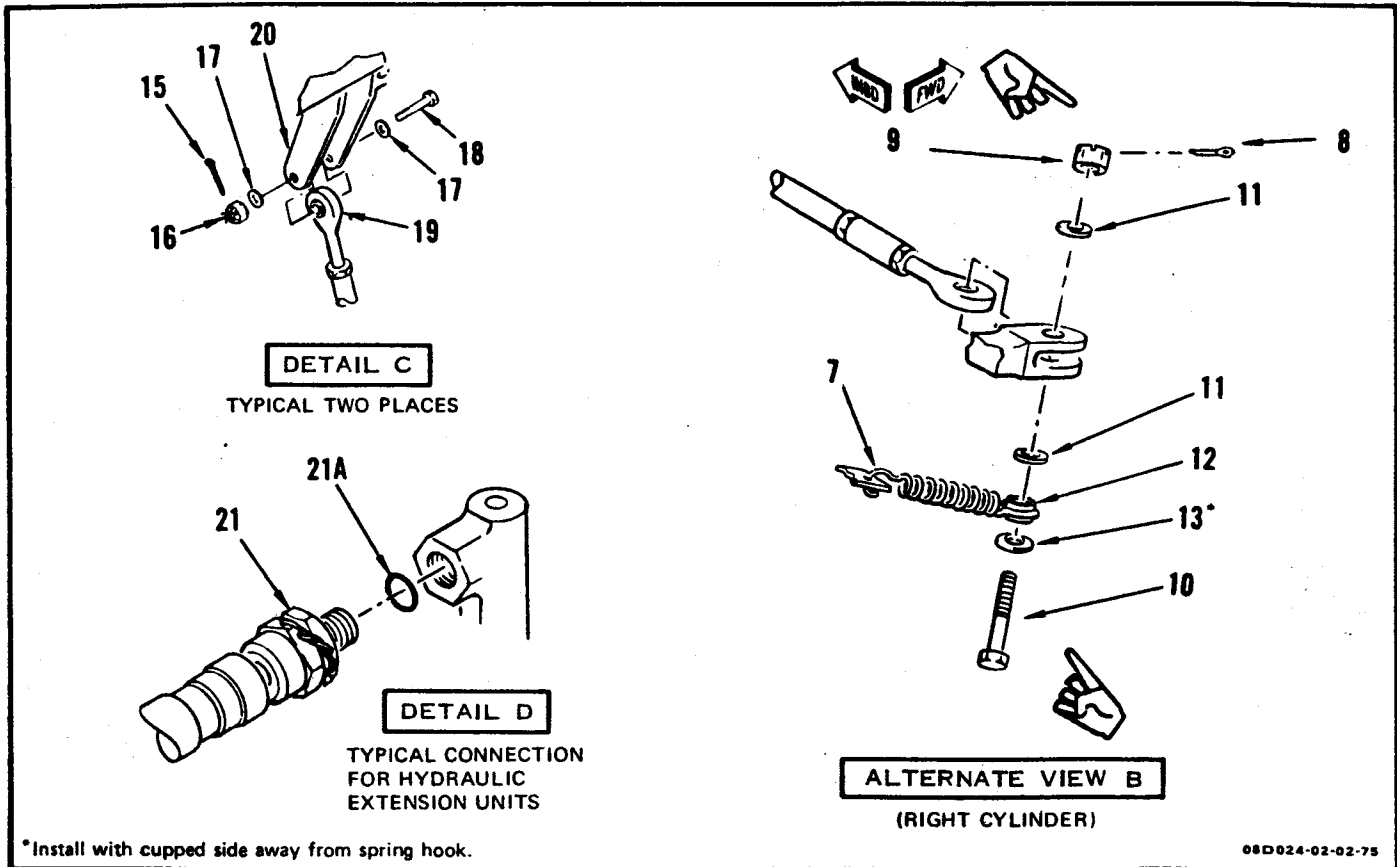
Spoiler/Deflector PC Cylinder Removal and Installation (Sheet 2)
